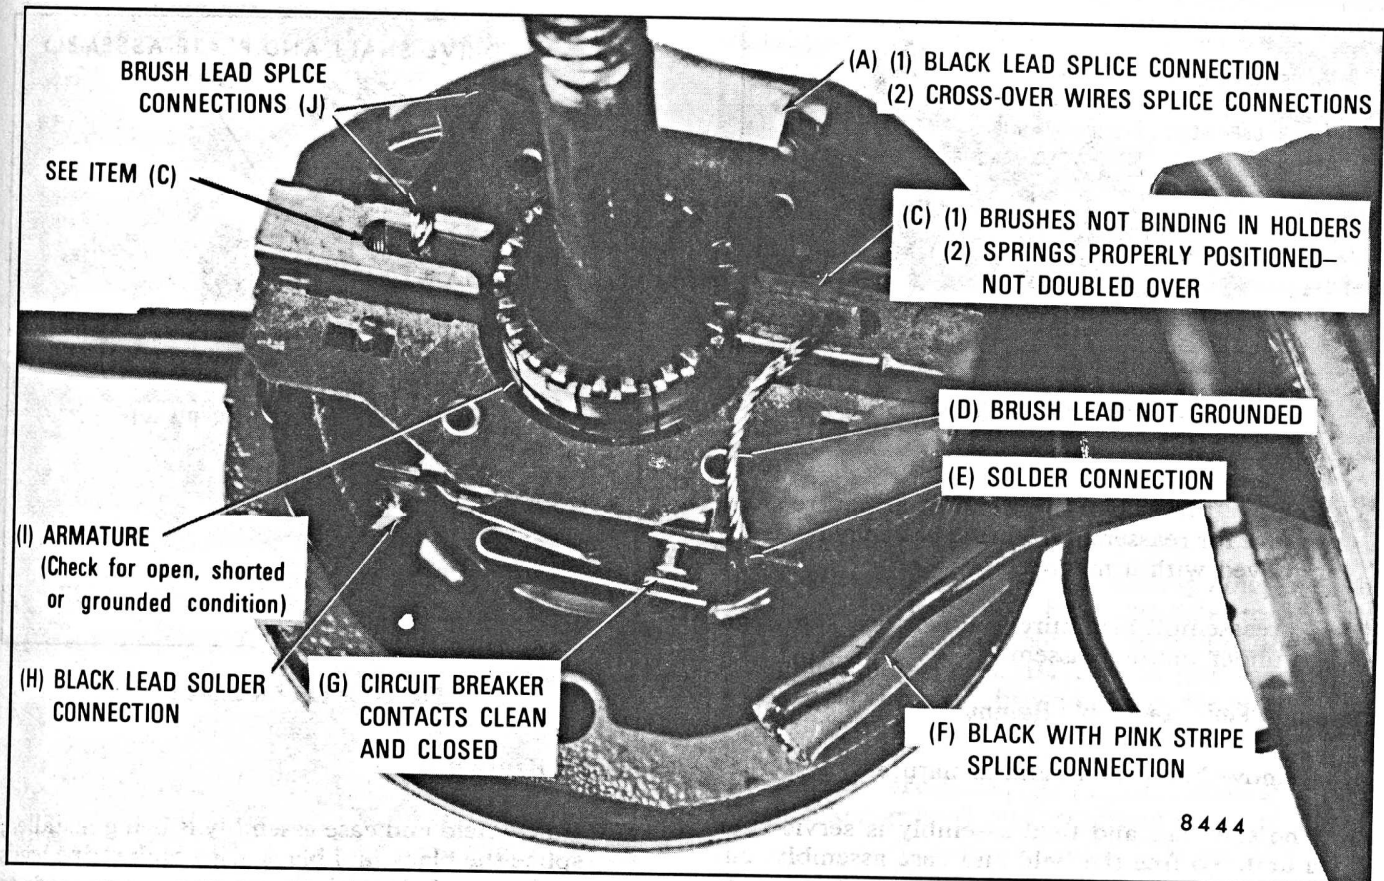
Visual Inspection Modified Pulse Motor
